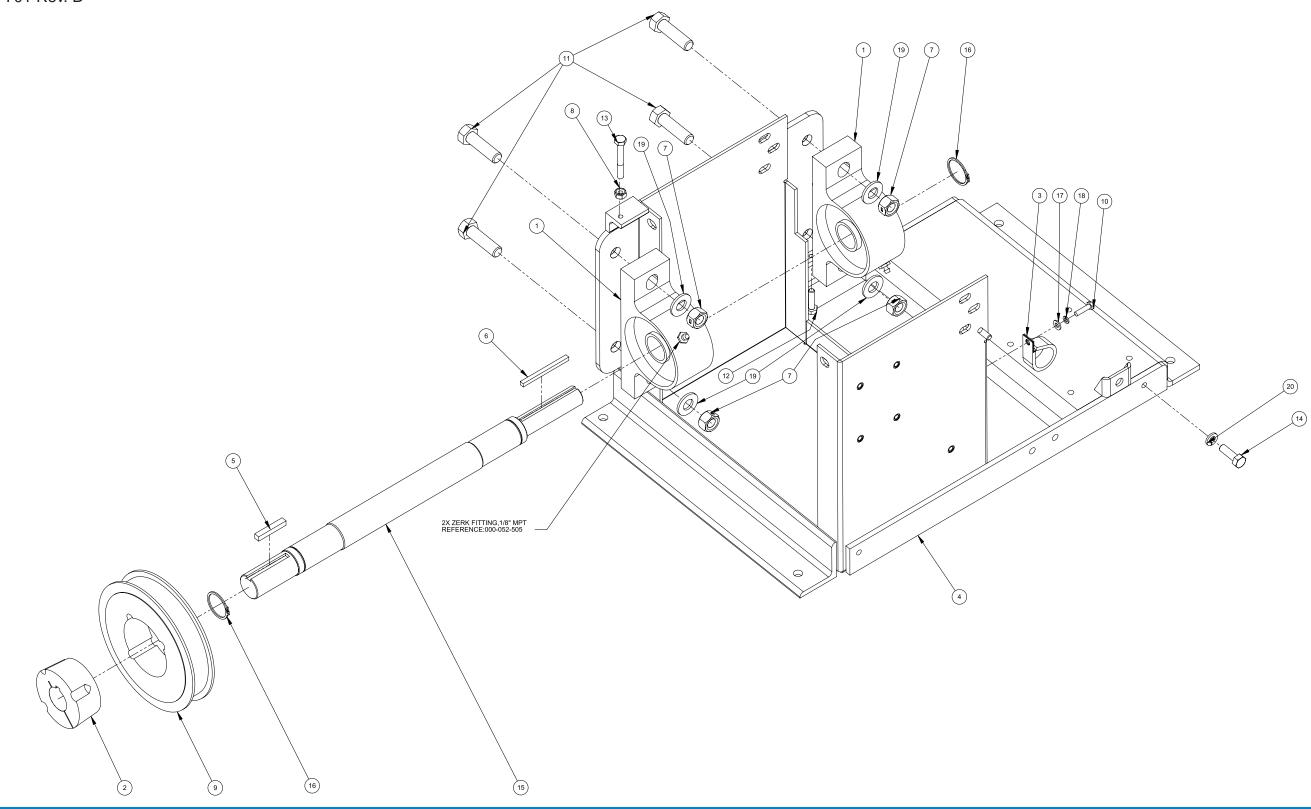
Frame Assembly 601-001-701 Rev. B
